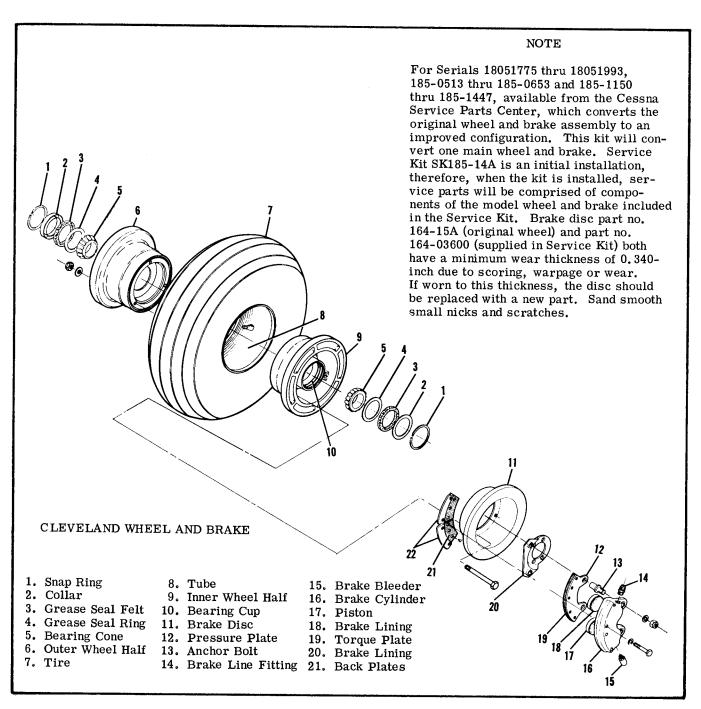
Wheel and Brake (Sheet 1 of 2)
